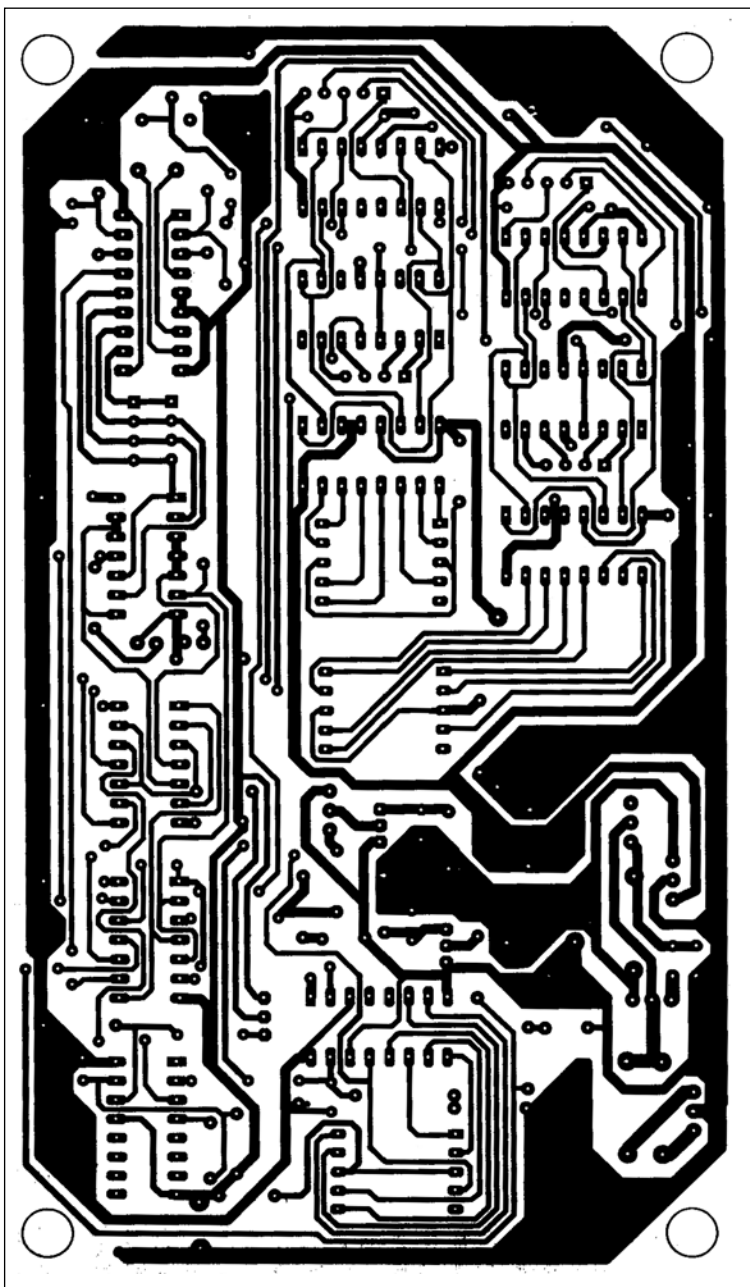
Actual-size, single-side PCB layout of the receiver, chance counter and relay driver circuit.
